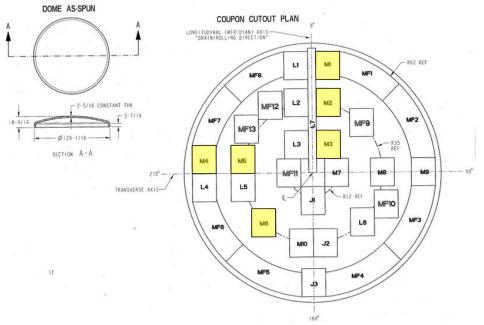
Aft Bulkhead Cut Plan showing the Location of the Fracture Coupon Blanks highlighted in Yellow
